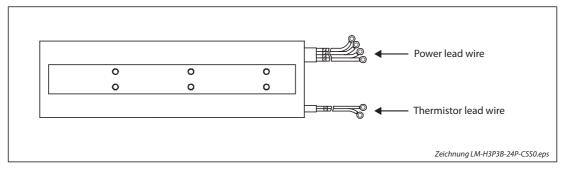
Servo motor series LM-H3 (Primary side – coil)
